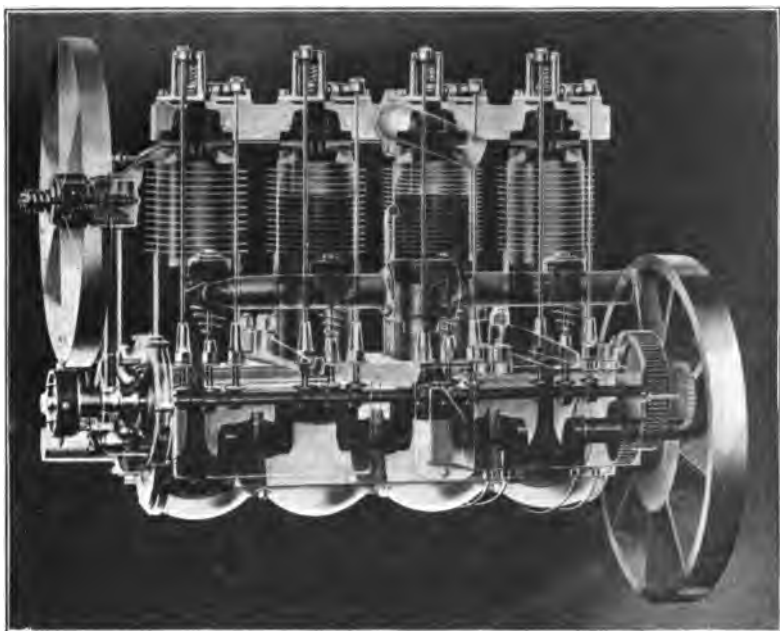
"Phantom" Drawing of 1908 Franklin Air-Cooled Engine.
